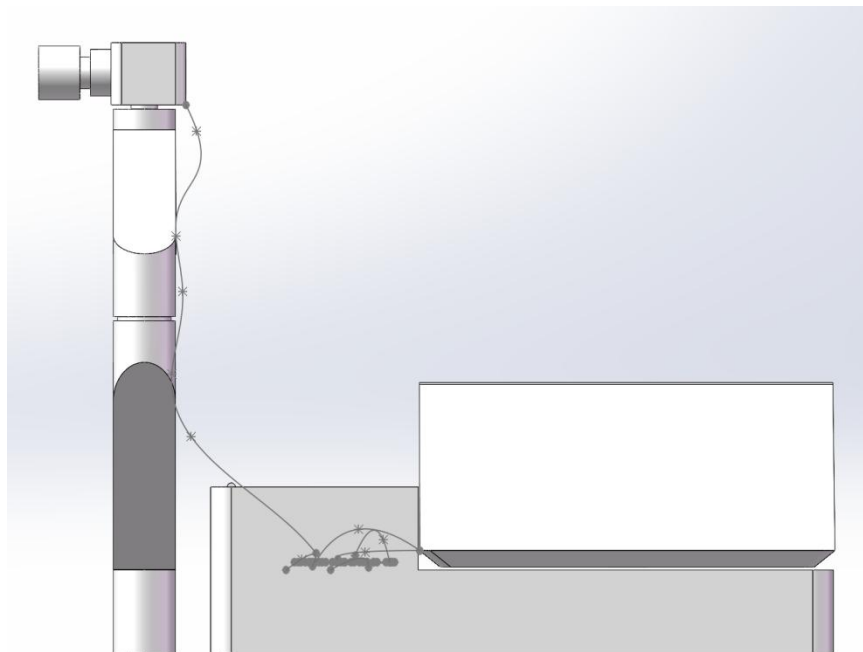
Side view of the outdoor enclosure and camera mounting assembly.
